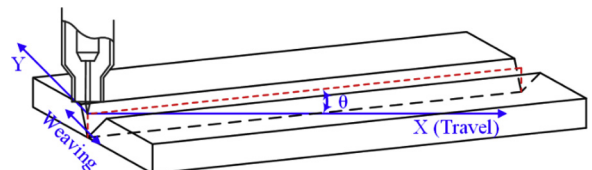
Welding torch travel direction deviates the weld seam with degree θ .
